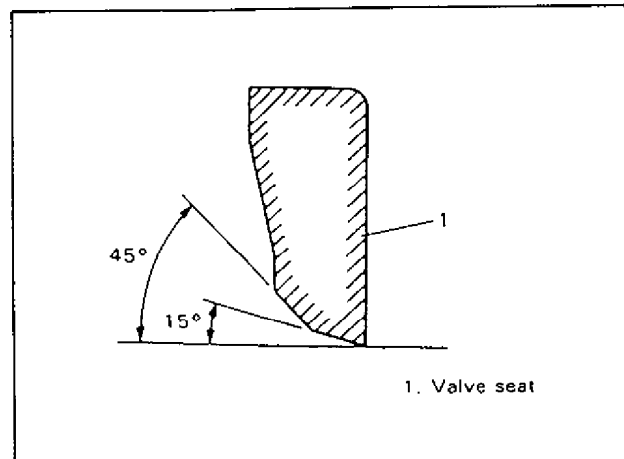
A-88 Valve Seat Angles for Exhaust Valve
